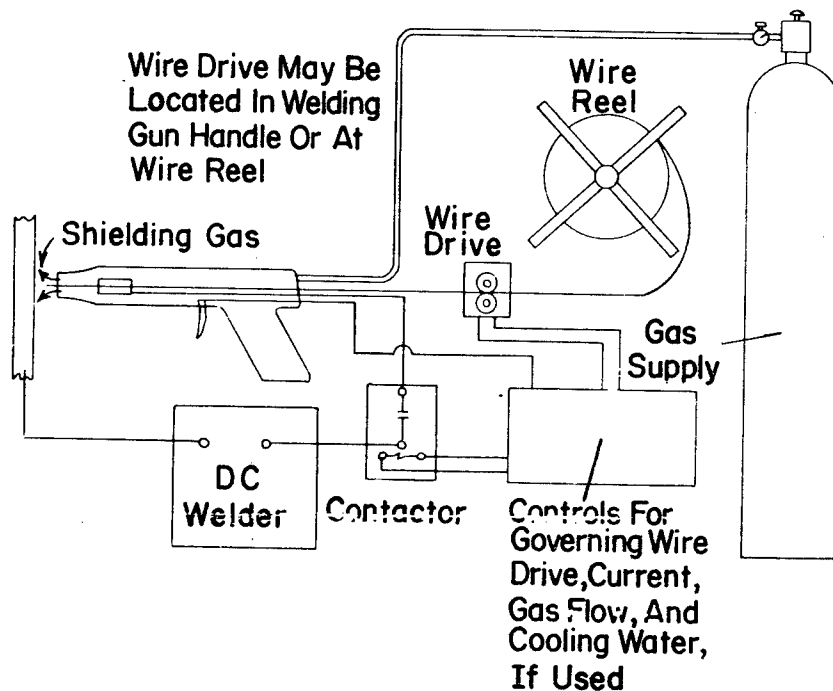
SCHEMATIC DIAGRAM OF GAS METAL-ARC WELDING PROCESS
